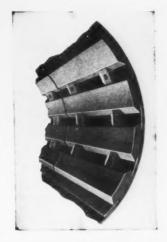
Liner for conical mills which is made with beveled edges to form depressions between plates
